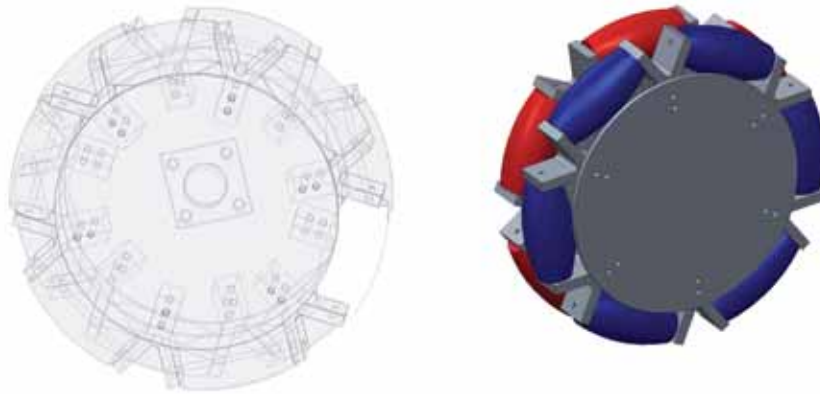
Initial CAD designs of Yoshimi's omni wheels in wireframe and solid view.
